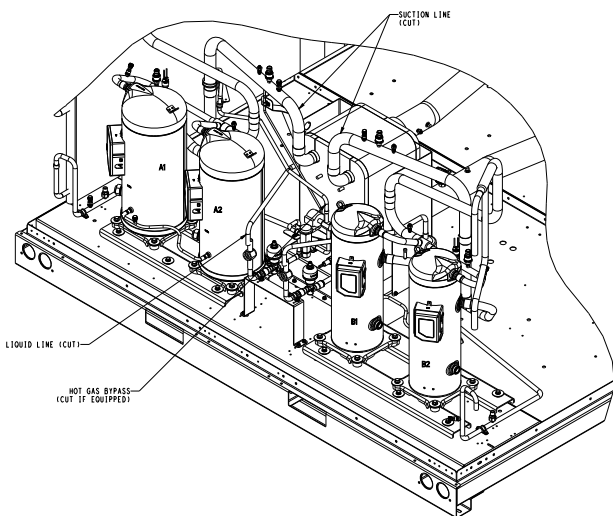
30RC035-060 Typical Unit Evaporator Piping (30RC040 Shown)
